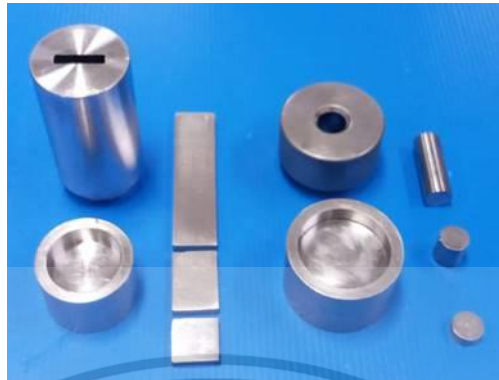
The Pelleting mould for pellet sample and bar sample.
